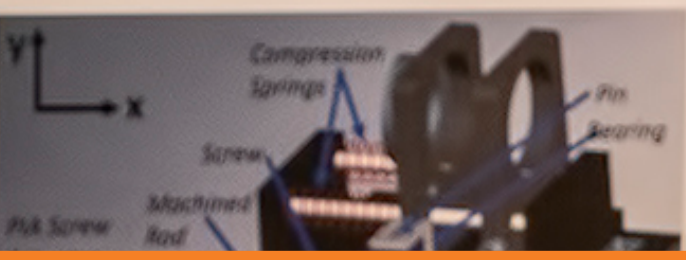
Final design with compression springs to move the lens backward, a bearing attached to the hole where the screw once was, and a rod which gives a 3:2 ratio advantage of the motor to allow it to travel more than 25 millimeters.
